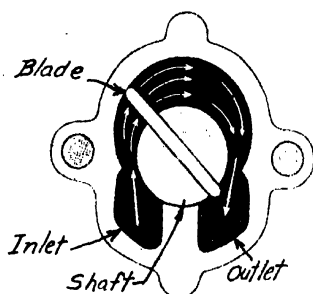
Section of Pneumatic Cleaner showing Operating Blade.
